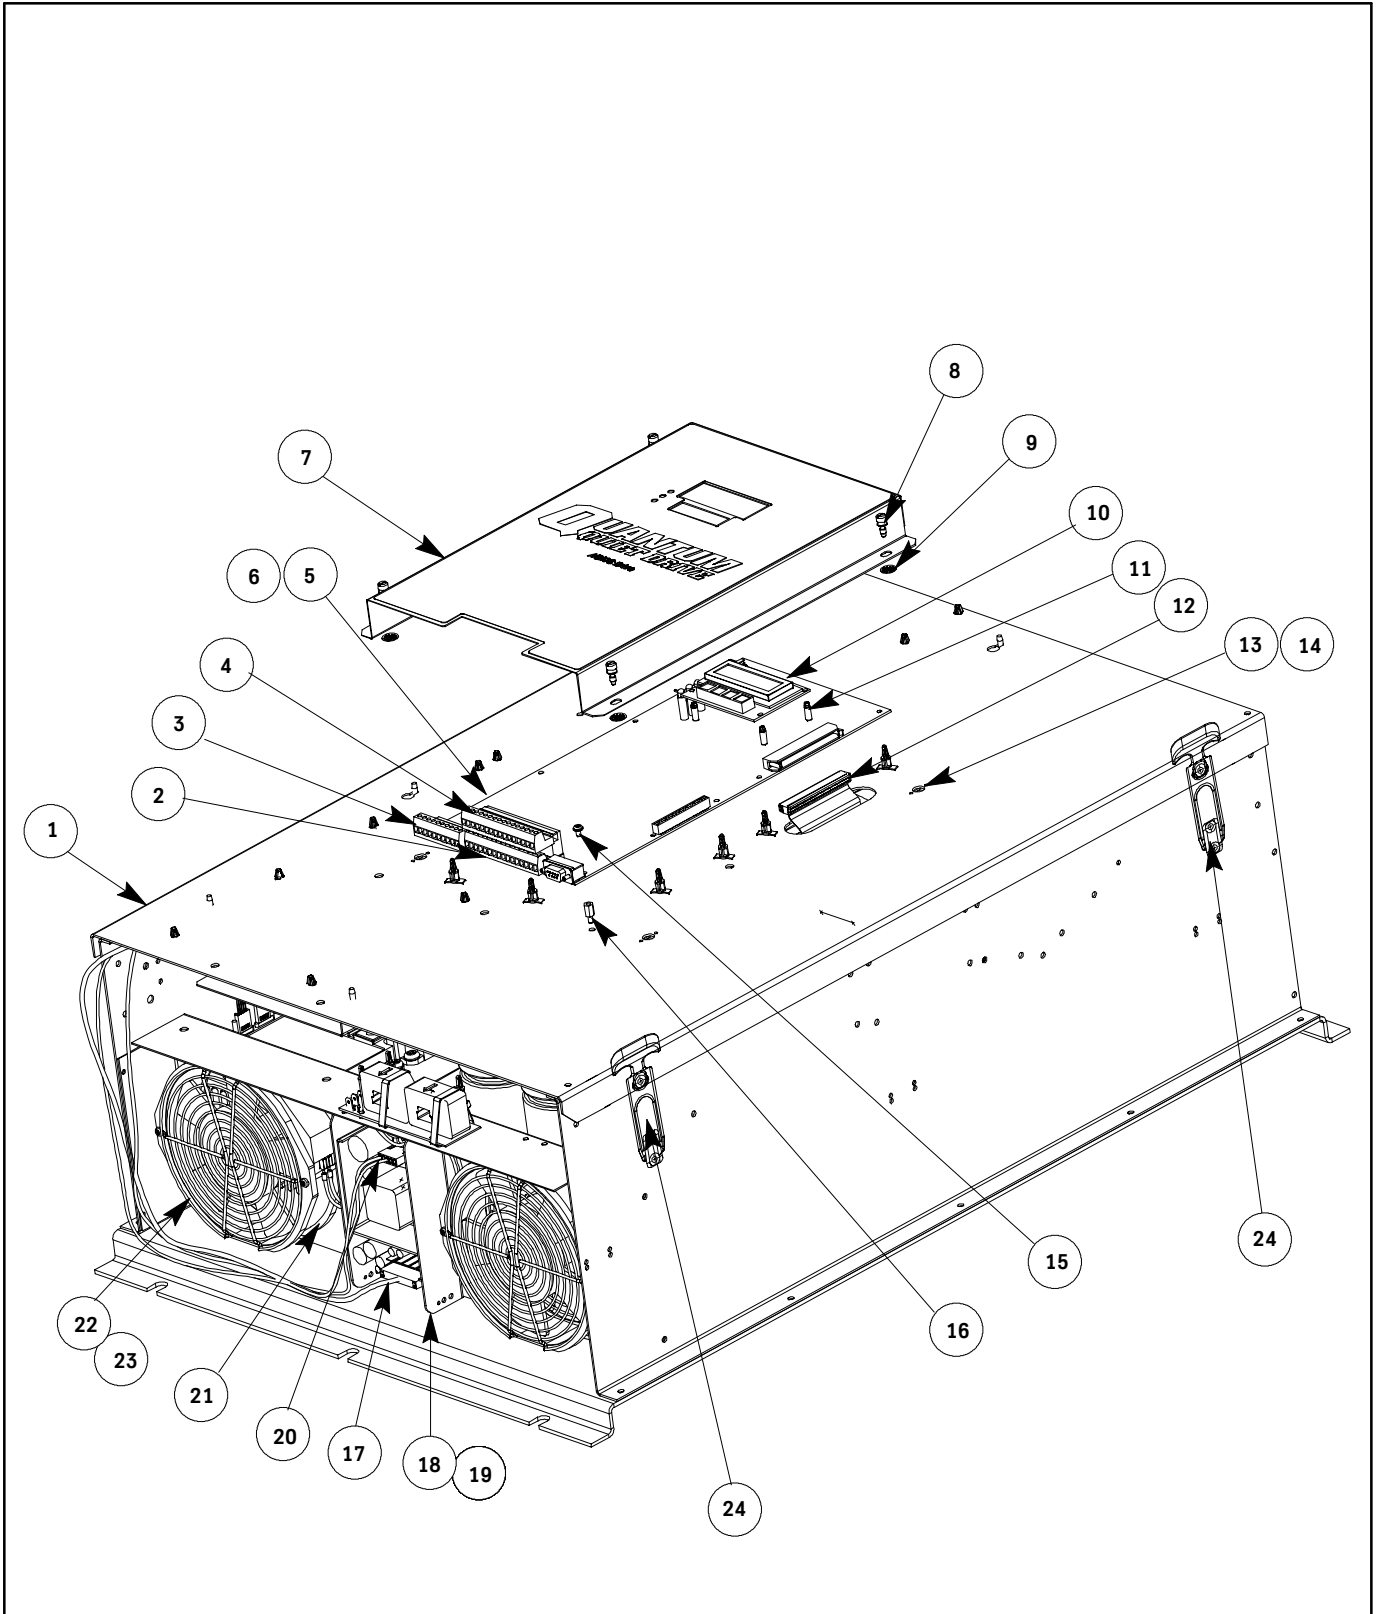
2109AW, 30-60 HP, 460V, Stand Alone, Regenerative Drive
